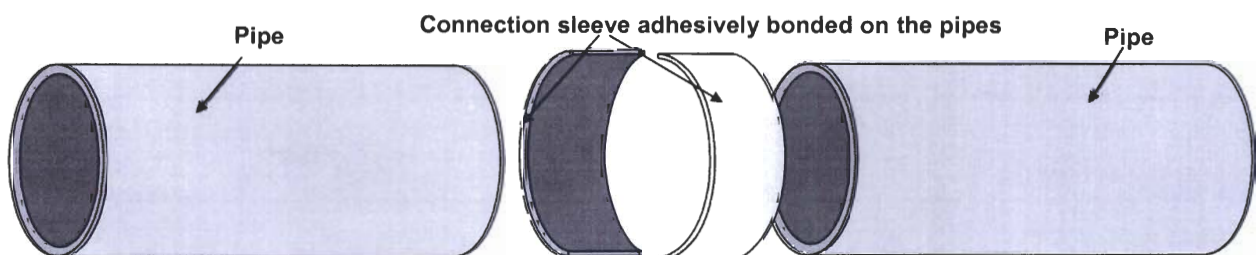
Developed joint design geometry for steel pipes up to 600 mm in diameter.
